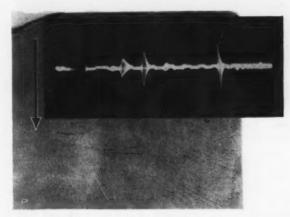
Defects in a bucket wheel hub and the oscilloscope of the defects.
